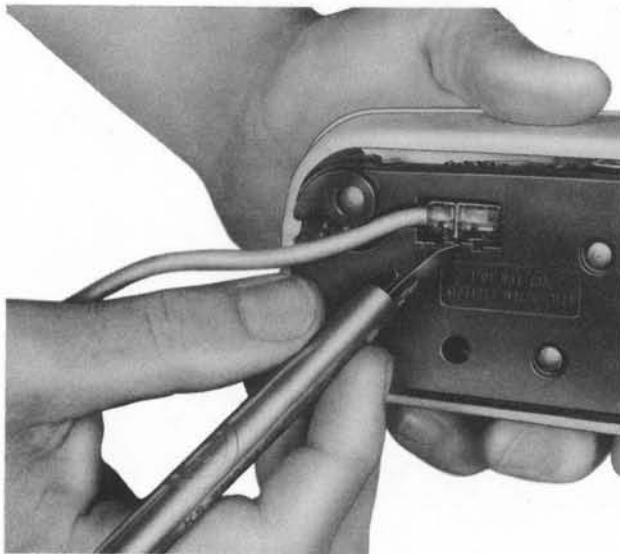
Mounting Cord From AD1 (MD) Telephone Base Using KS-21107L1 Tool
